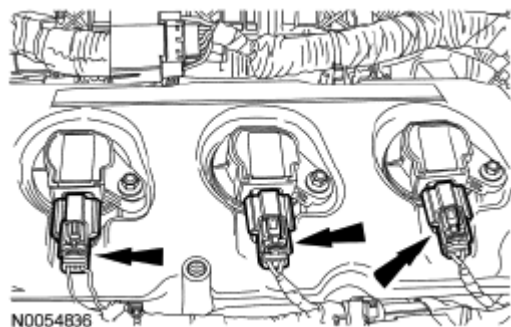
Locating LH Coil-On-Plug Electrical Connectors
